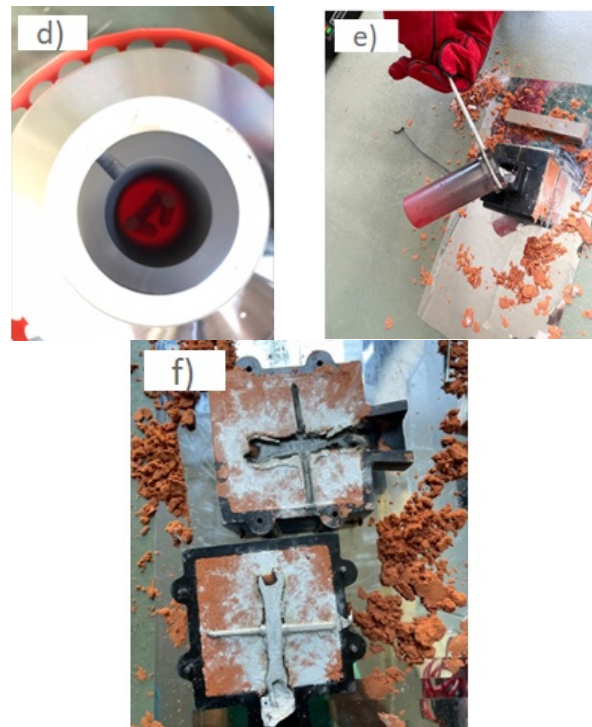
Melting of aluminium, pouring and extraction of the casted tool (d-f)
